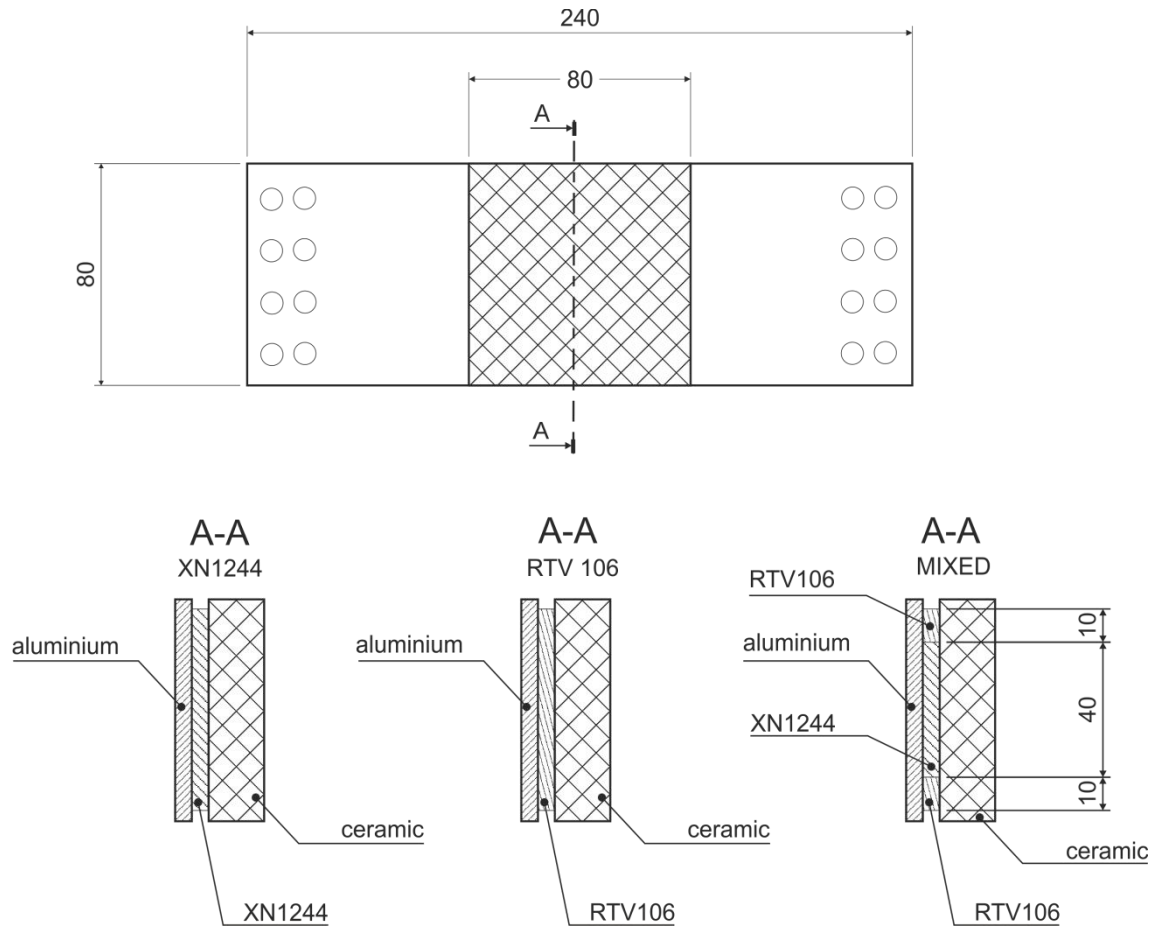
Schematic views of the specimens used and the three different configurations (dimensions in mm)
